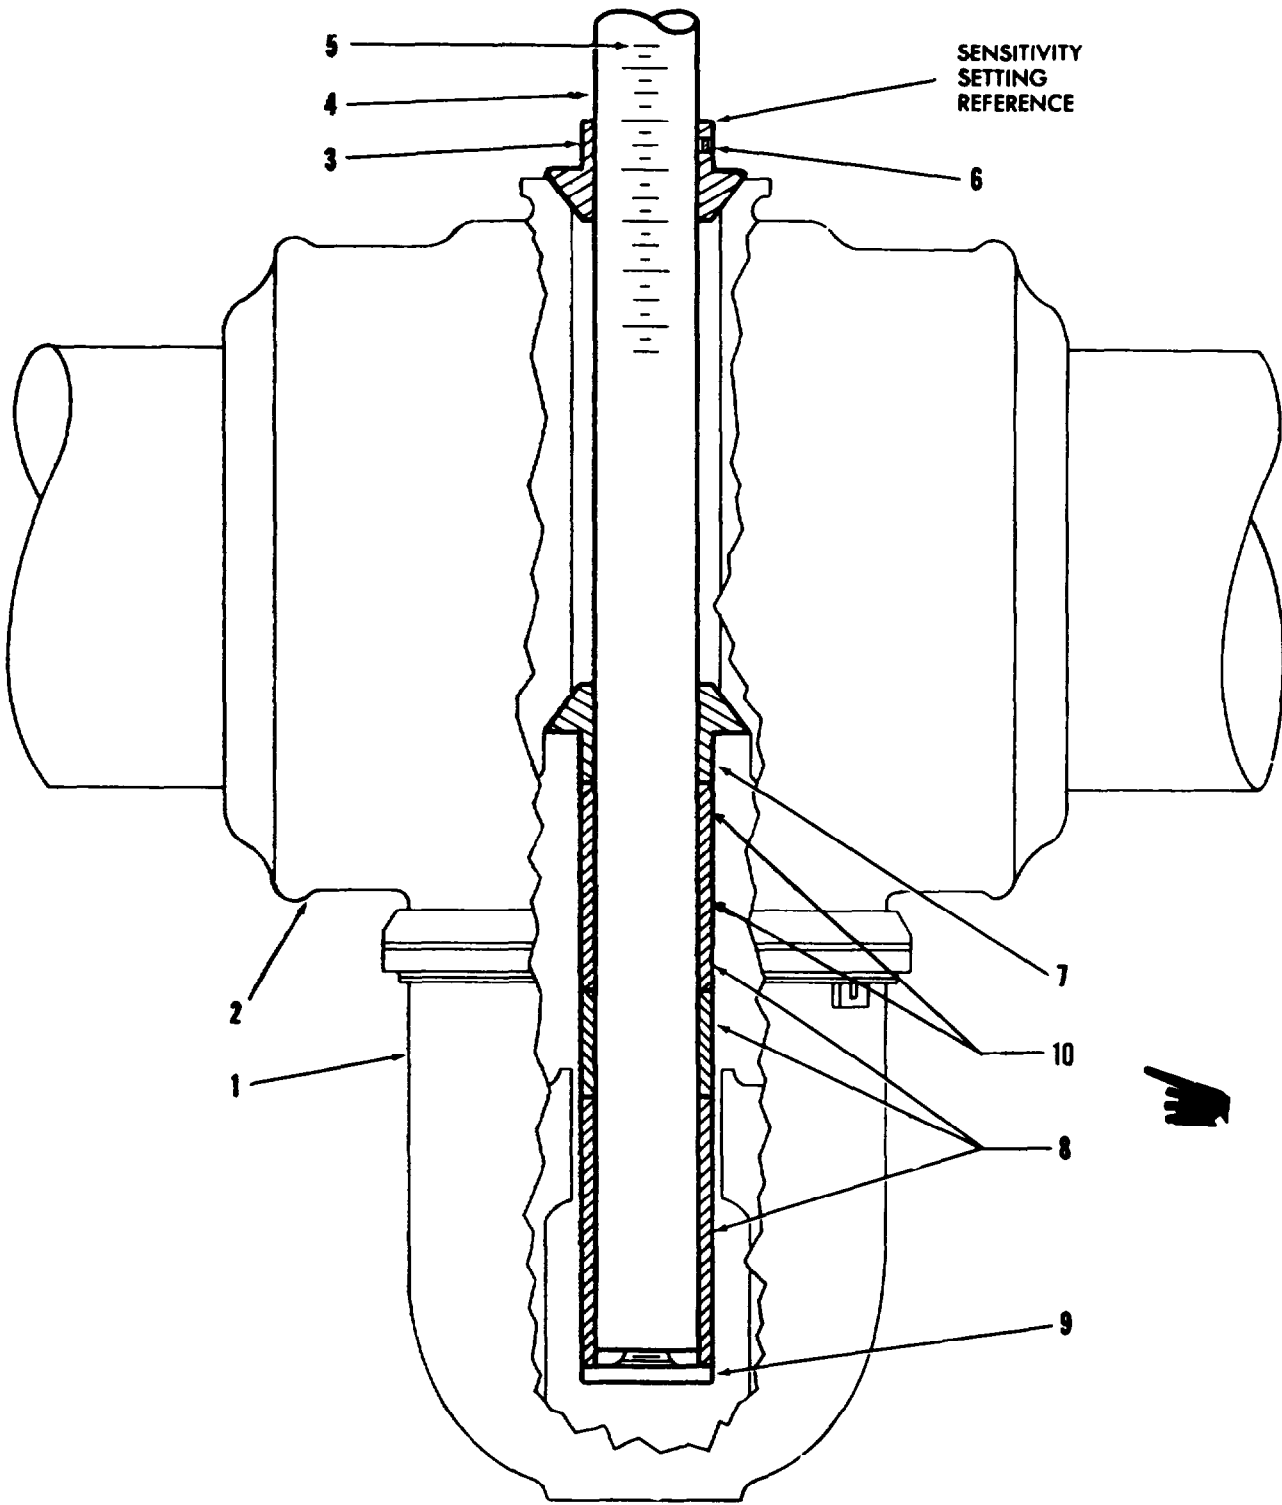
Typical Balancer Installation - Double-cone Propeller Assemblies - Shaft Nut and Front Cone Removed but Dome Assemblies Installed.
